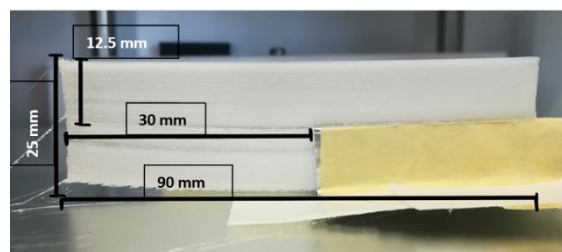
Dimensions of trouser specimen. The thickness of the specimen is 1mm.
